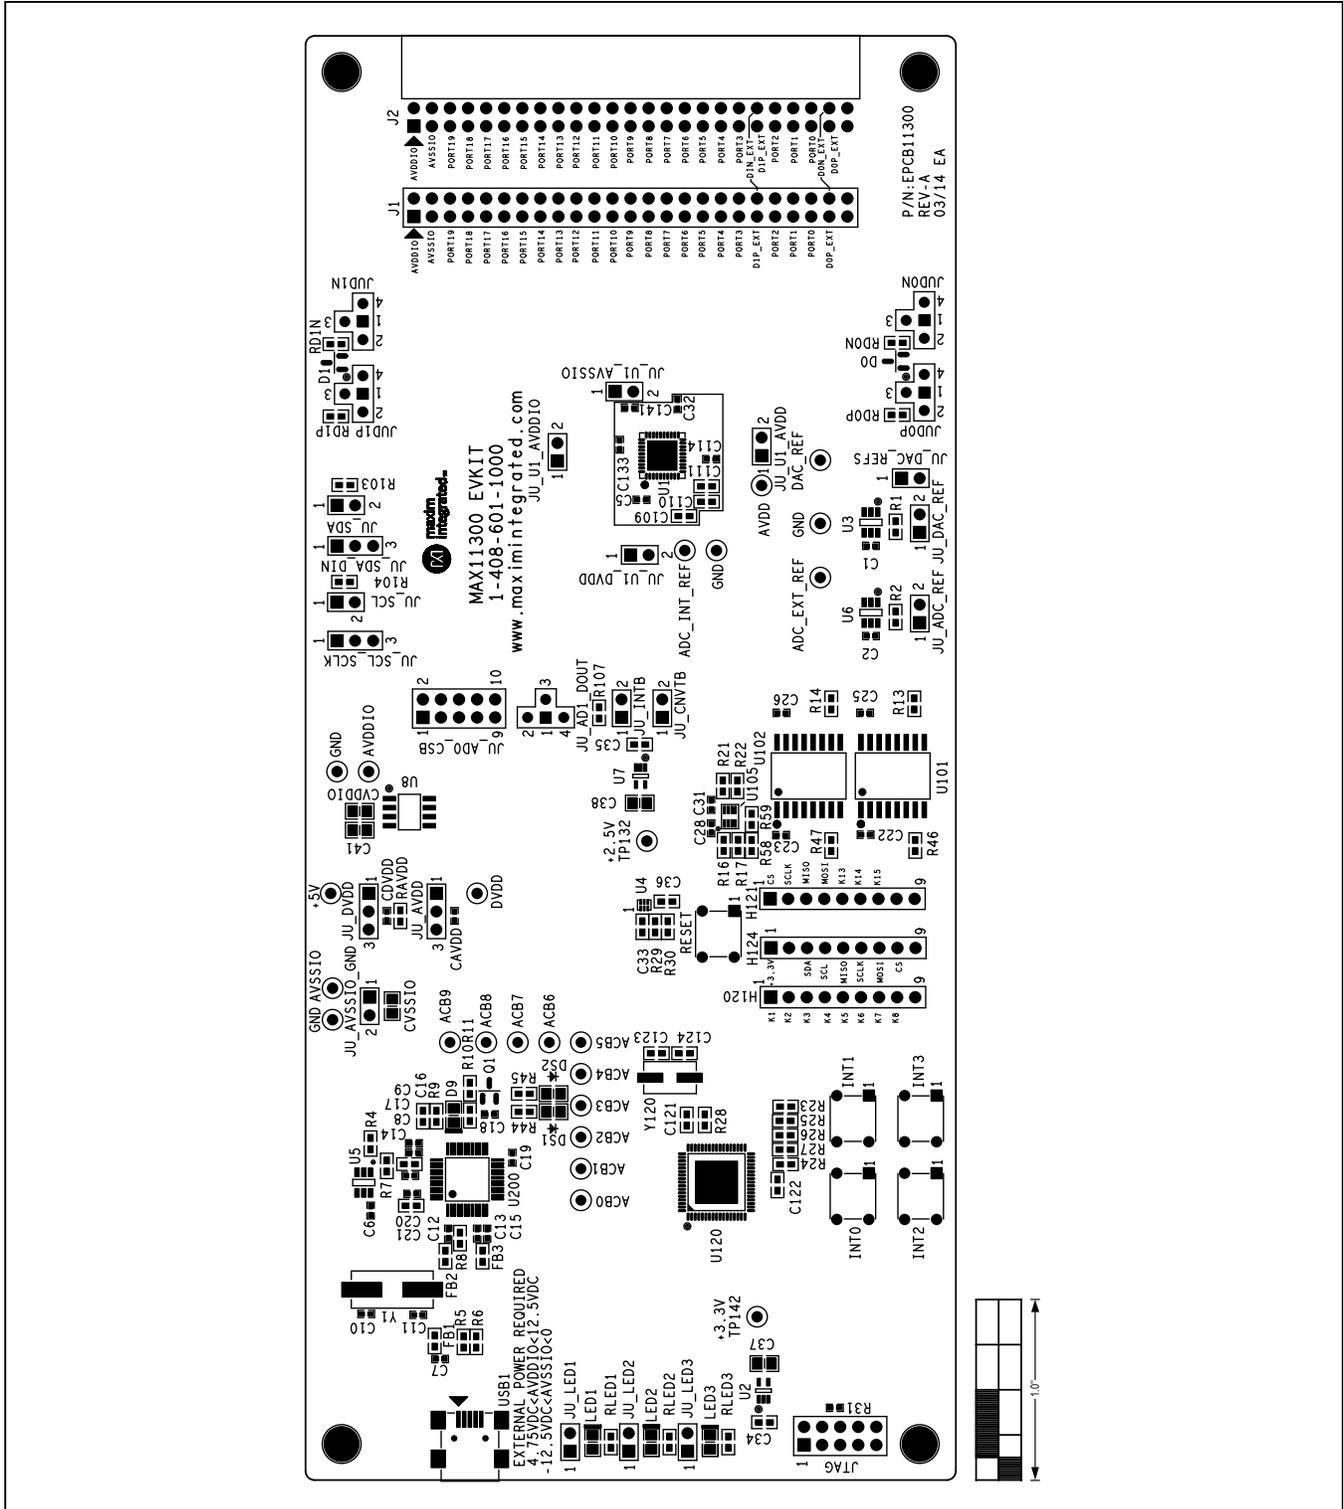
MAX11300 EV Kit Component Placement Guide—Component Side
